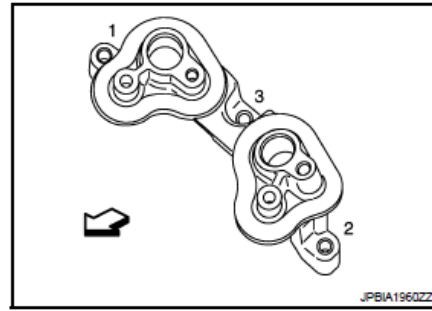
Identifying Camshaft Sensor Bracket Bolts Tightening Sequence
